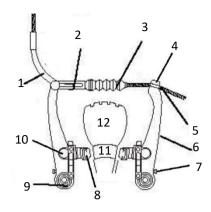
Diagram of rim brake parts, view from back. 1 Pipe 2 Link 3 No touch 4 Cable-clamp bolt 5 Cable 6 Brake Arm 7 Centre-adjustment screw 8 Brake shoe (brake pad) 9 Arm clamp bolt 10 Pad clamp bolt 11 Rim of wheel 12 Tyre
